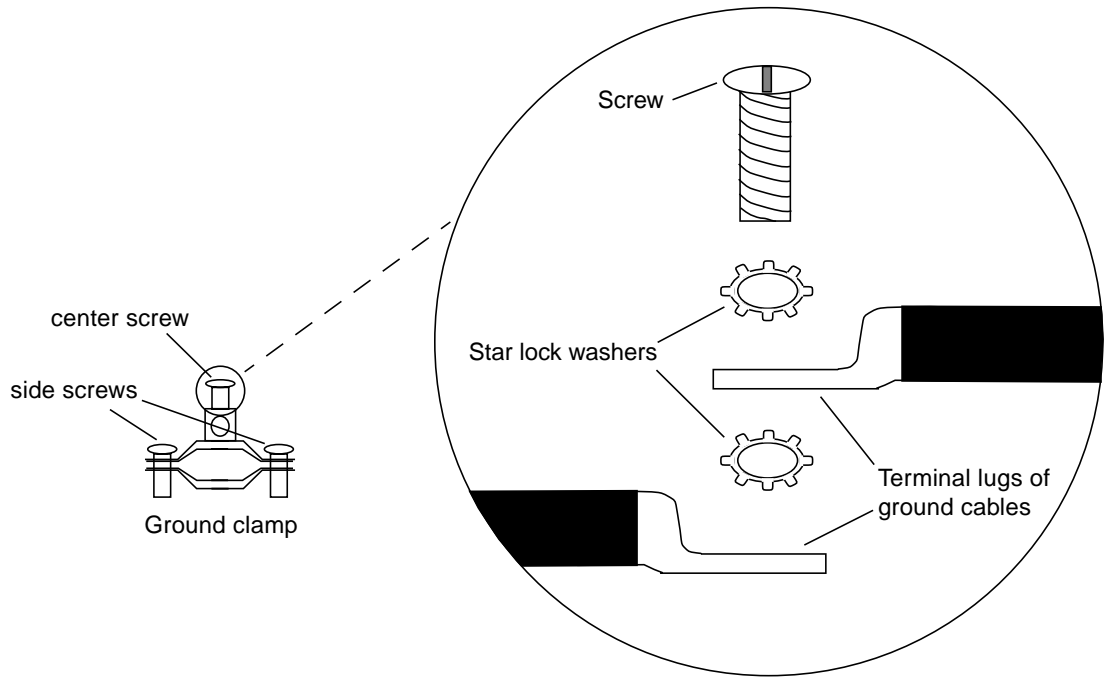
Ground Cables Connected to Ground Clamp
